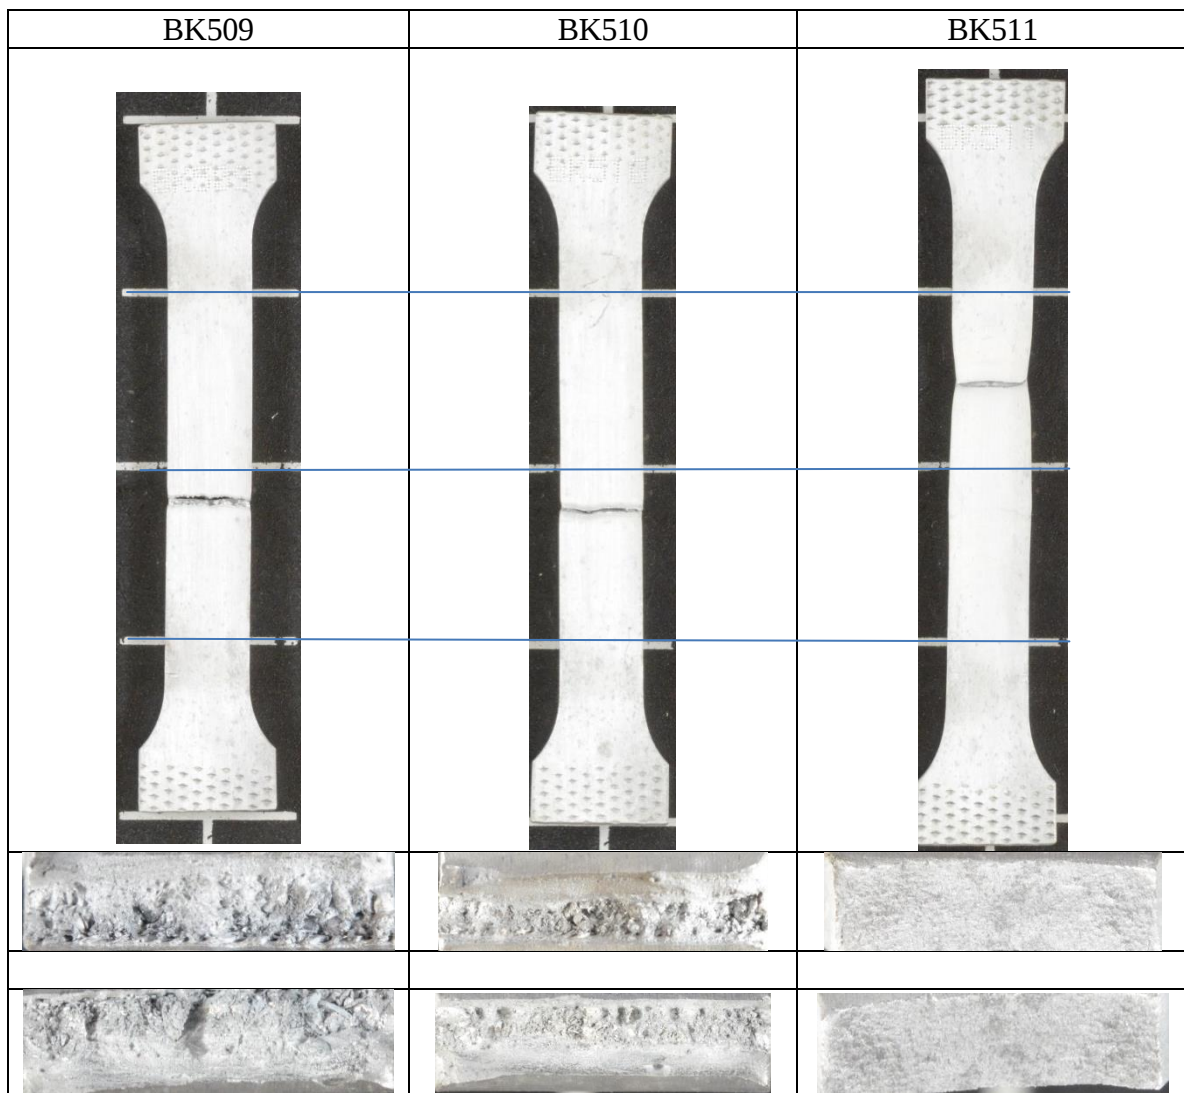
Fracture surface of AA5086-AA5086 welds at Kilauea for 2-year exposure.
